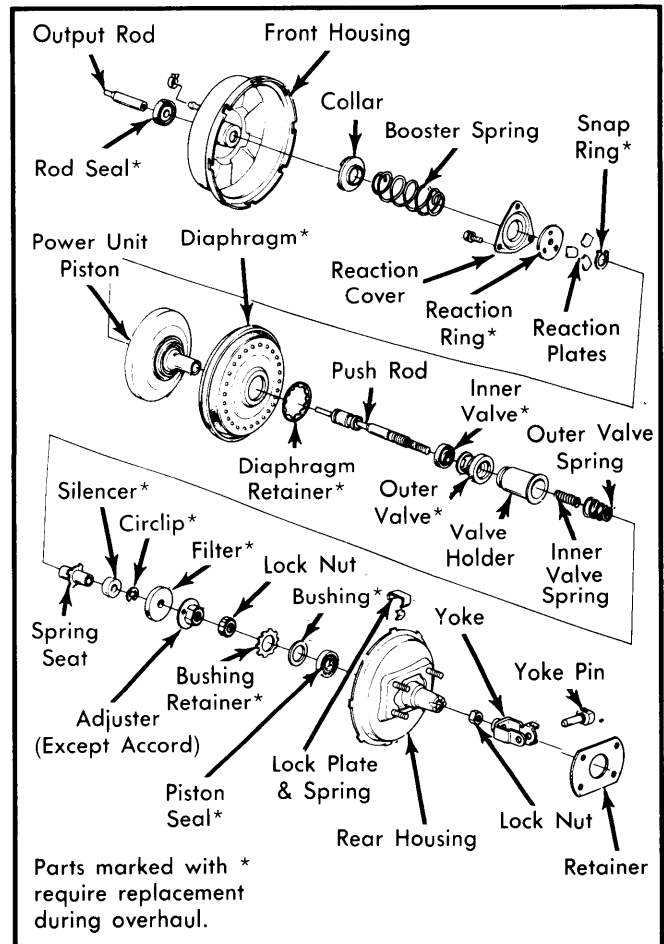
Exploded View of Power Brake Unit (Civic and Prelude Shown – Accord Similar)
